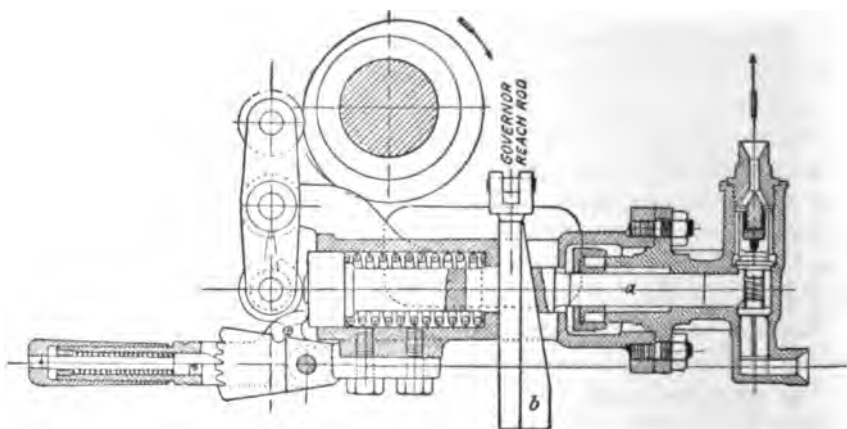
Cross section of oil pump designed to supply oil to open nozzles without opposing air pressure.
